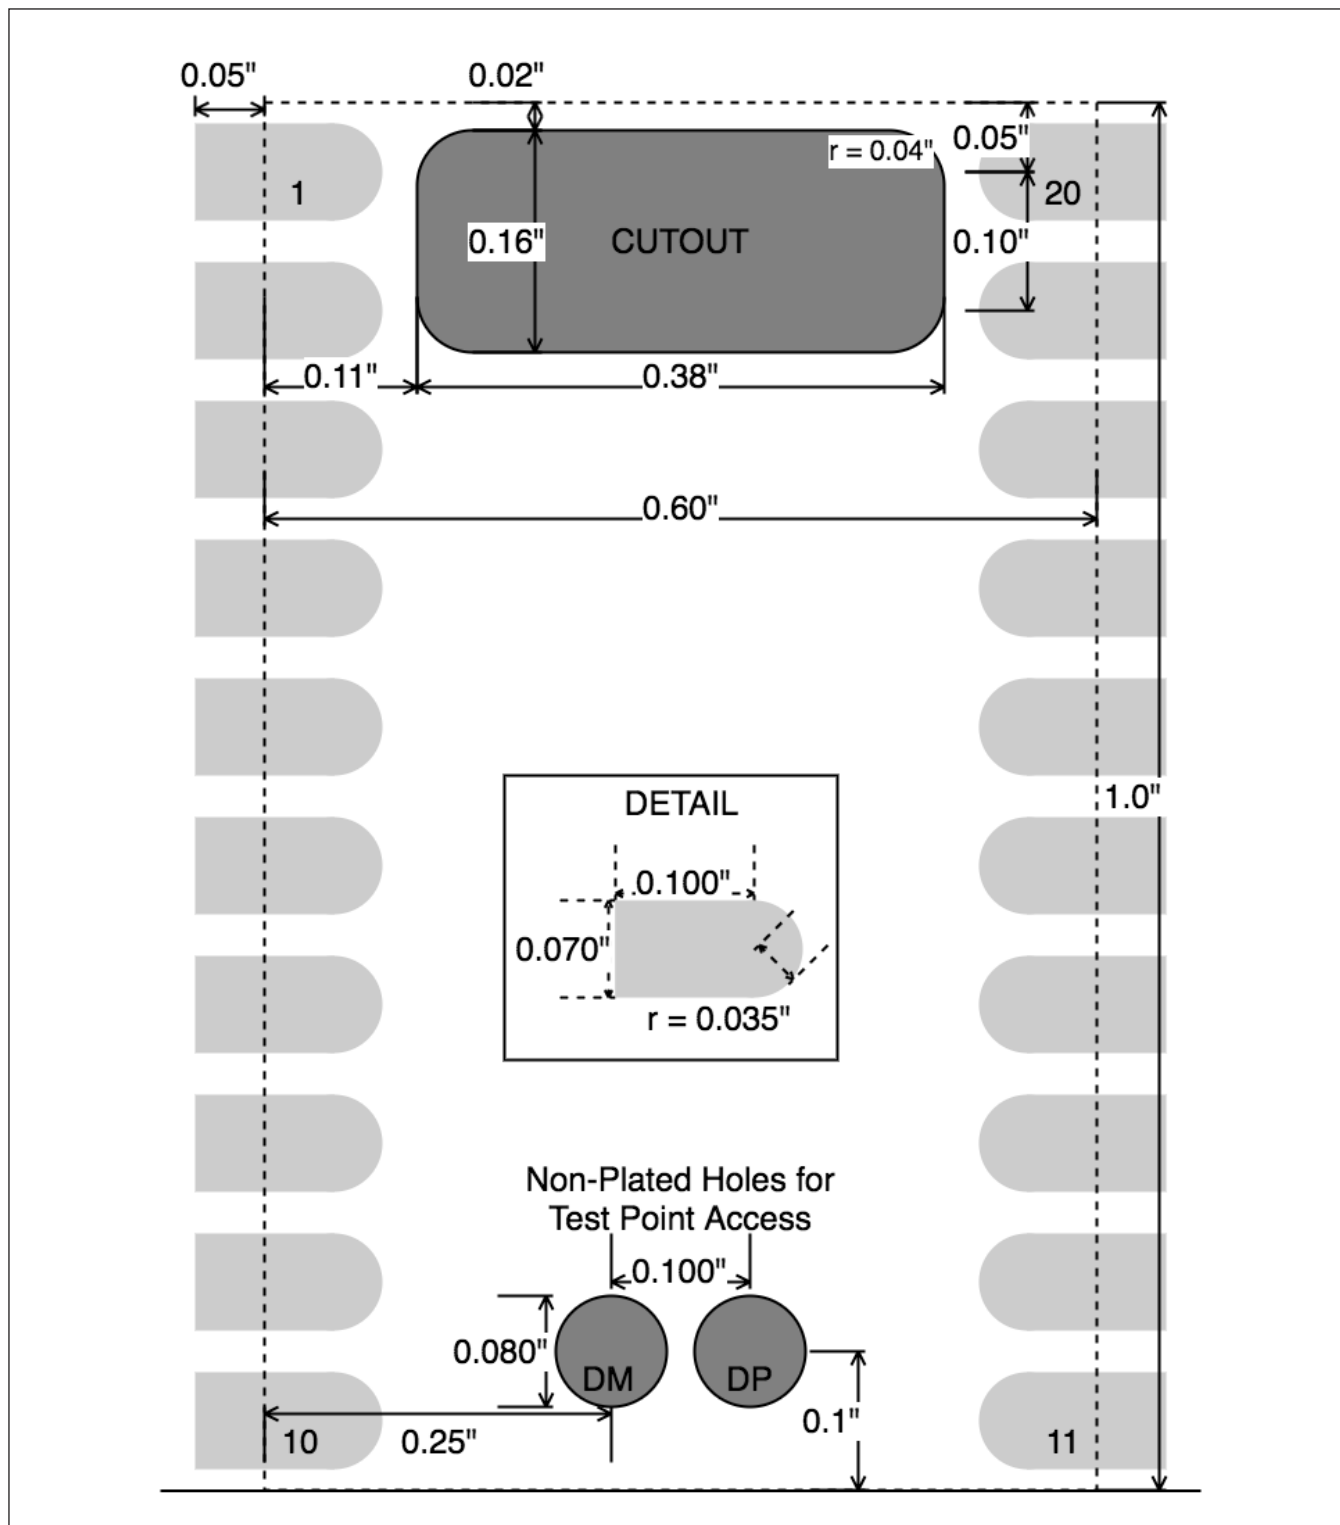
MAX32625PICO Surface Mount Footprint, Cutouts
